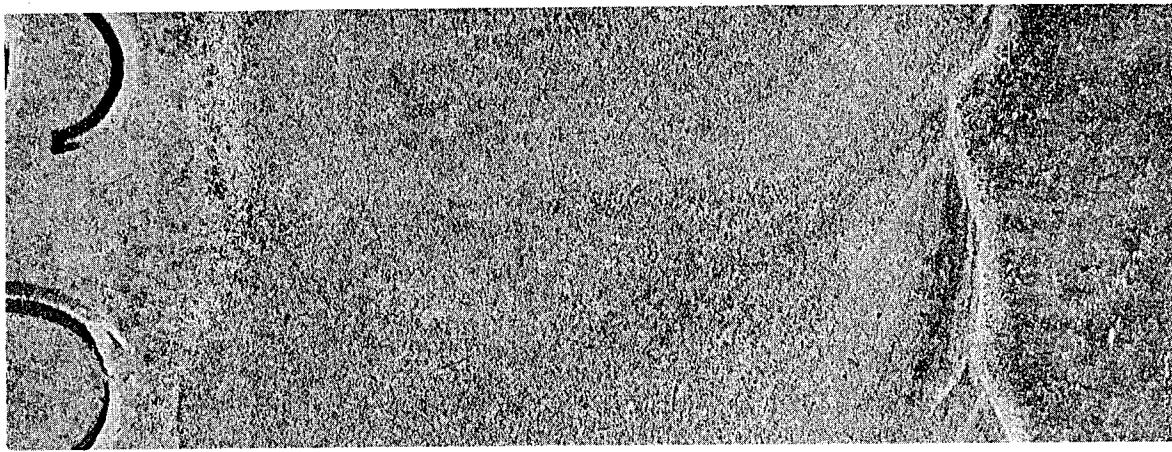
CORROSION OF 309 SCb WELDS IN BOILING 0.075M HF
